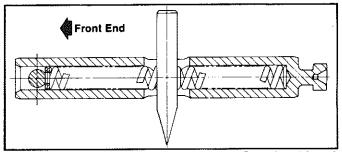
Clutch Actuator Rod with One Additional Shim Washer Added to Front End
